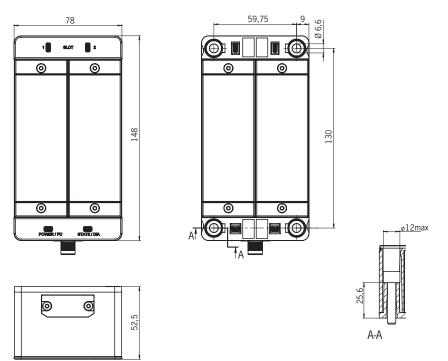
Dimension drawing for 2-slot expansion module MCM
